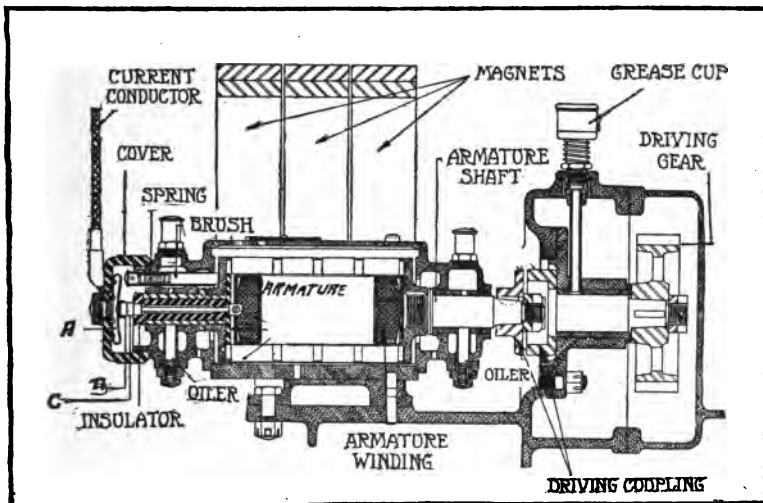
Sectional View Showing Construction of Locomobile Low Tension Magneto.
